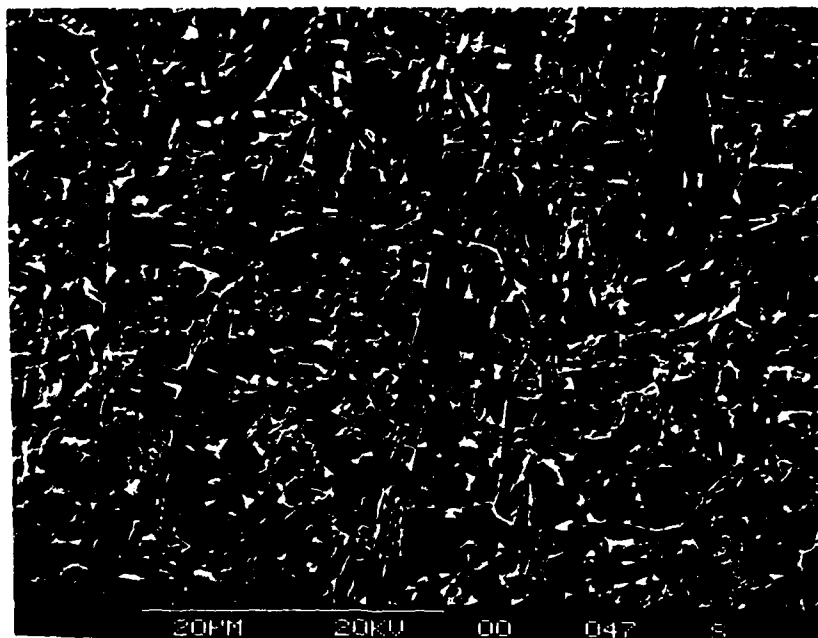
Weld A weld metal M-A constituent. 2000X.
